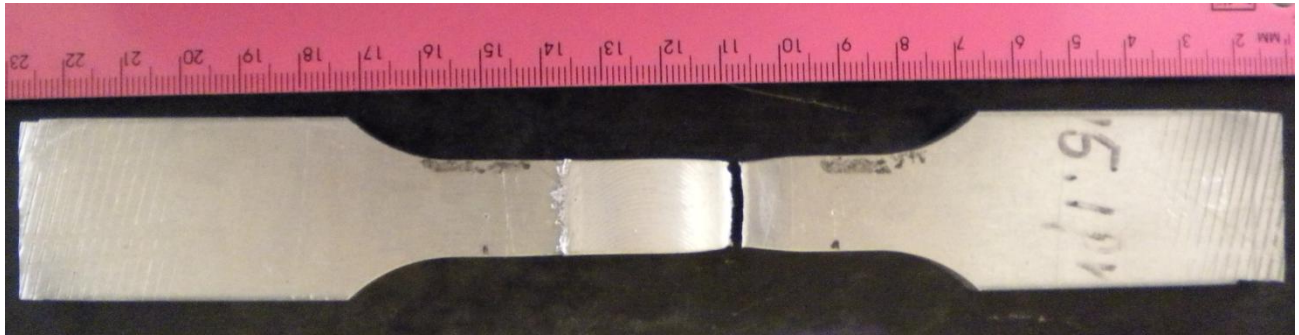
Tensile fracture at the radius of the tool shoulder on the advancing side (Sample 32.)
